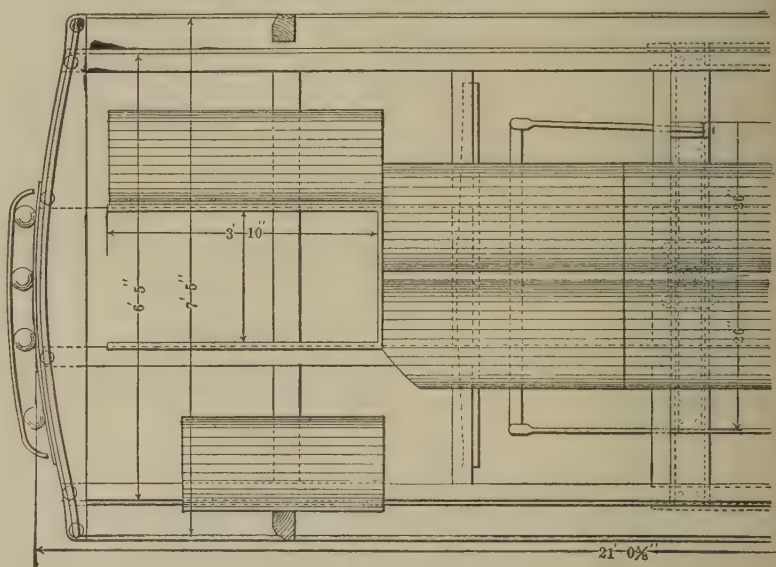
OPEN GRIP CAR—J. G. BRILL CO.
